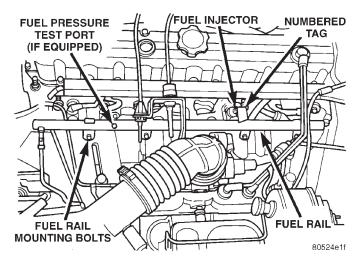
Fuel Pressure Test Port—4.0L Engine
